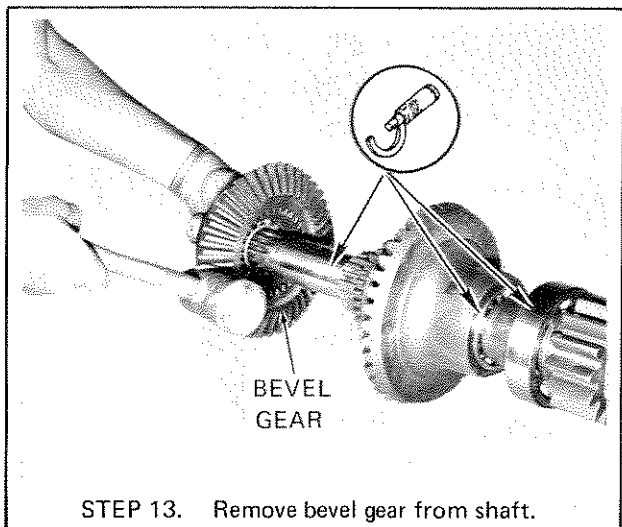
Removal And Disassembly of Brake And Bevel Gear Shaft Components (Sheet 3 of 4)
